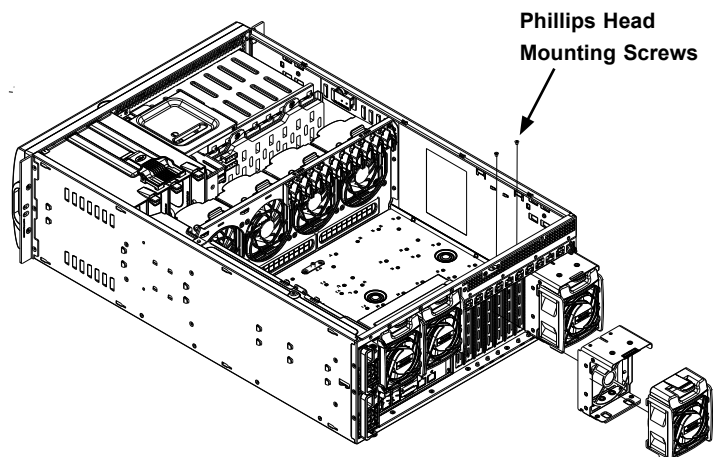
Placing the External Rear Fan and Bracket on the Chassis
